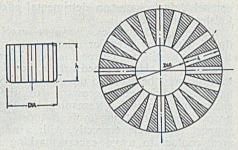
Body of a Cylindrical Drawn Cup. FIG. 4.—Cut-away Blank for Producing the Cup shown in Fig. 3.
